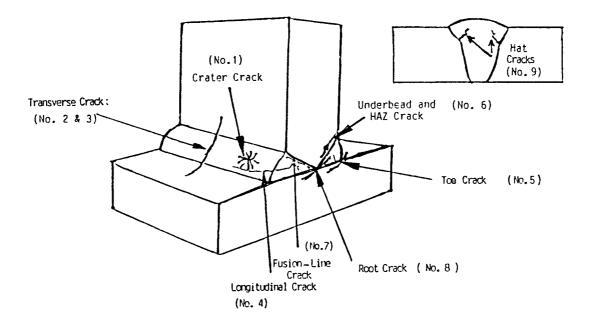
Different types of cracks located in and around a welded joint.
